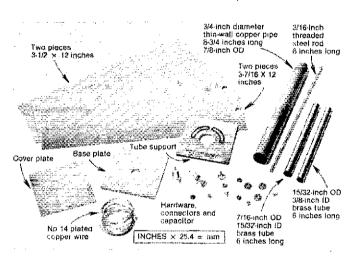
All parts needed to build a single cavity are shown in this photo. Six cavities were combined to make the duplexer shown in Fig. 1. The tube support, cover plate and base plate are all 3-7/16 inches square. The base place center hole is 7/16 inch in diameter and the tube support hole is 7/8 inch. The top plate is cut from 1/16-inch thick, double-clad stock, while 1/8-inch stock was used for the tube support and base plate.
